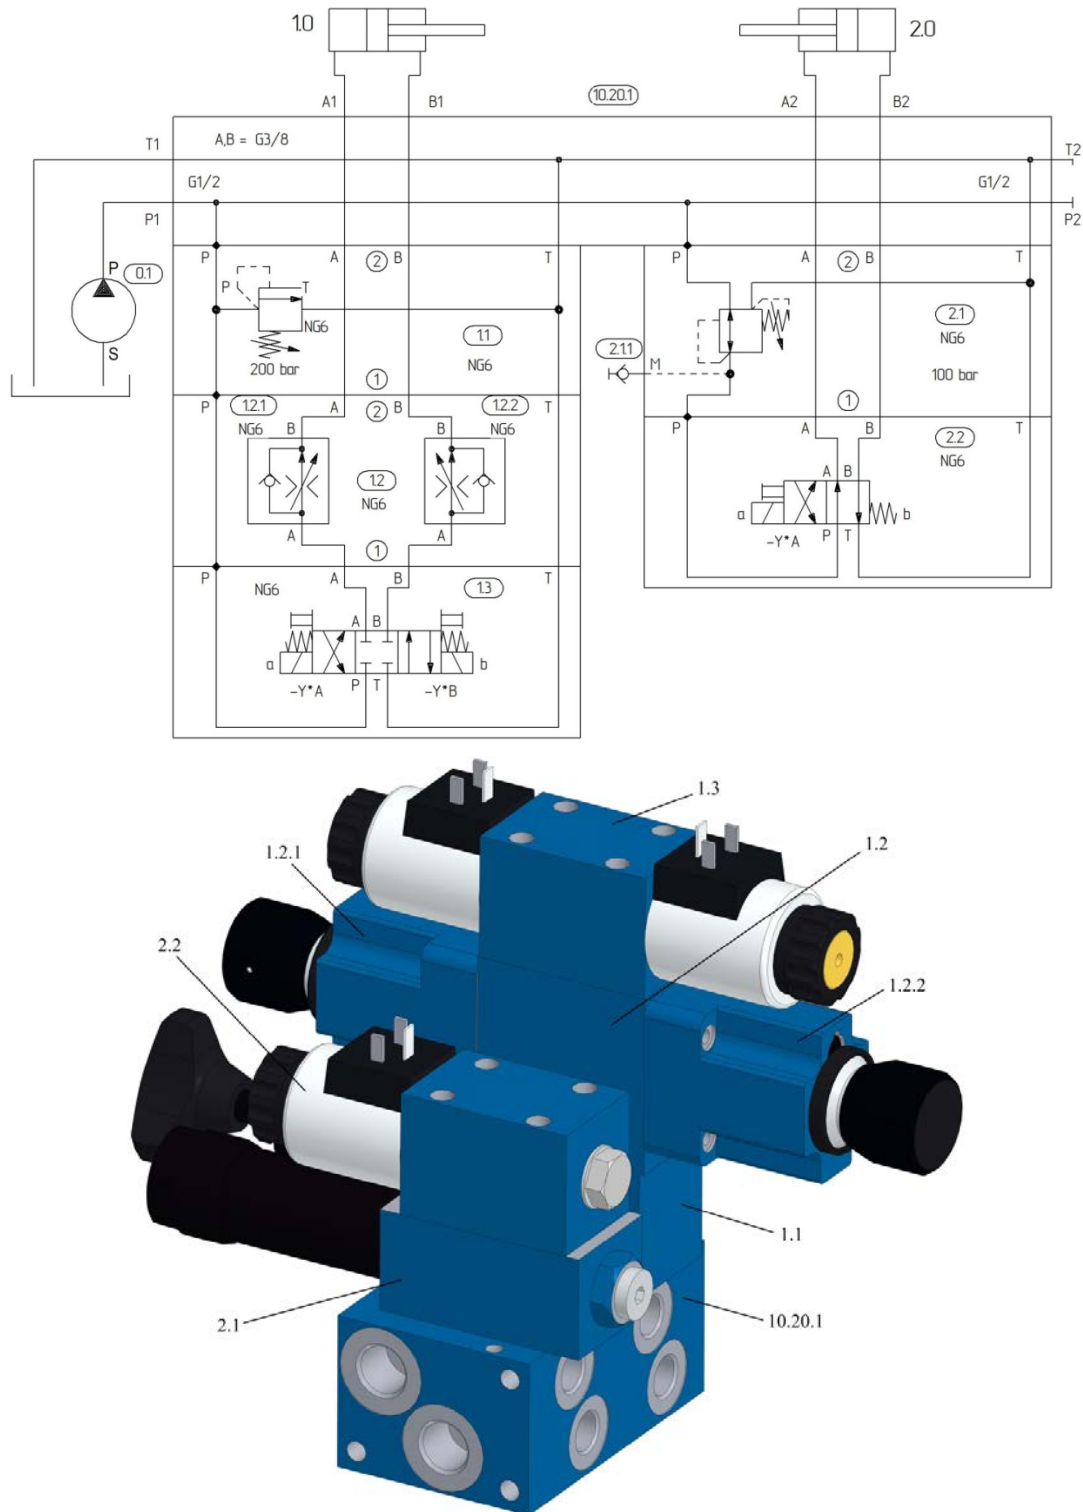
Hydraulic scheme of round saw machine drive, made on the basis of modular equipment and two-seat mounting plate:
